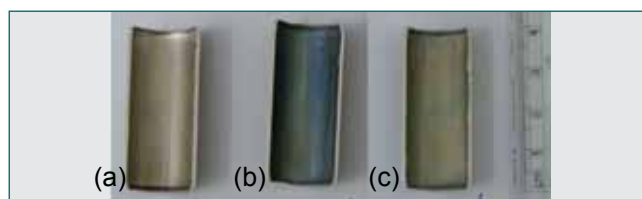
(a) Polished; (b) anodized (c) anodized and Cu coated Ti tube surfaces
